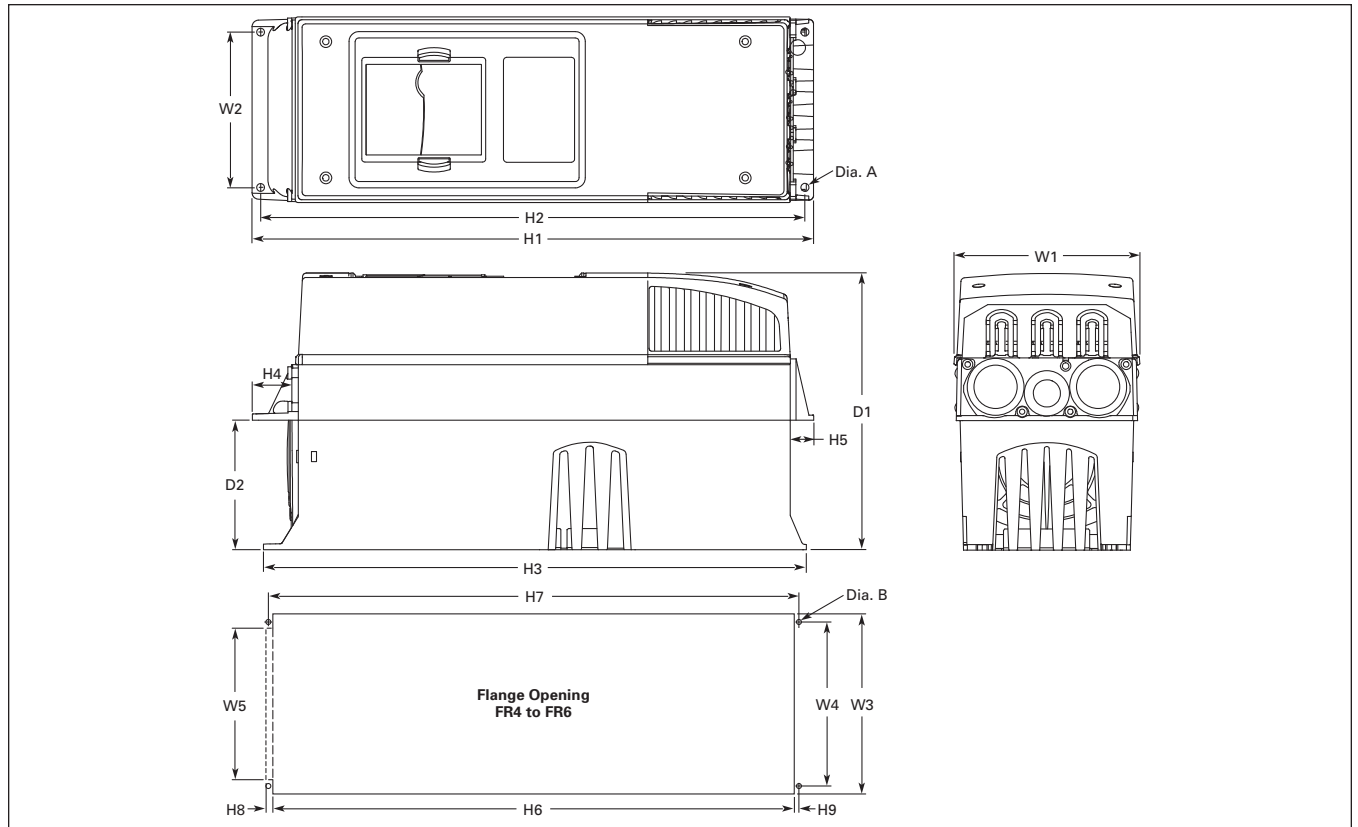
VSD Series Open Drive Dimensions, TYPE 1 and TYPE 12 with Flange Kit, FR4, FR5 and FR6
